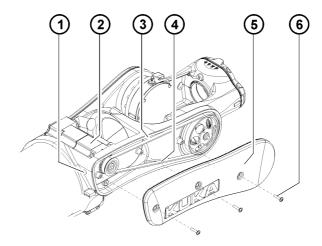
Measuring and adjusting the toothed belt tension on axis 6
